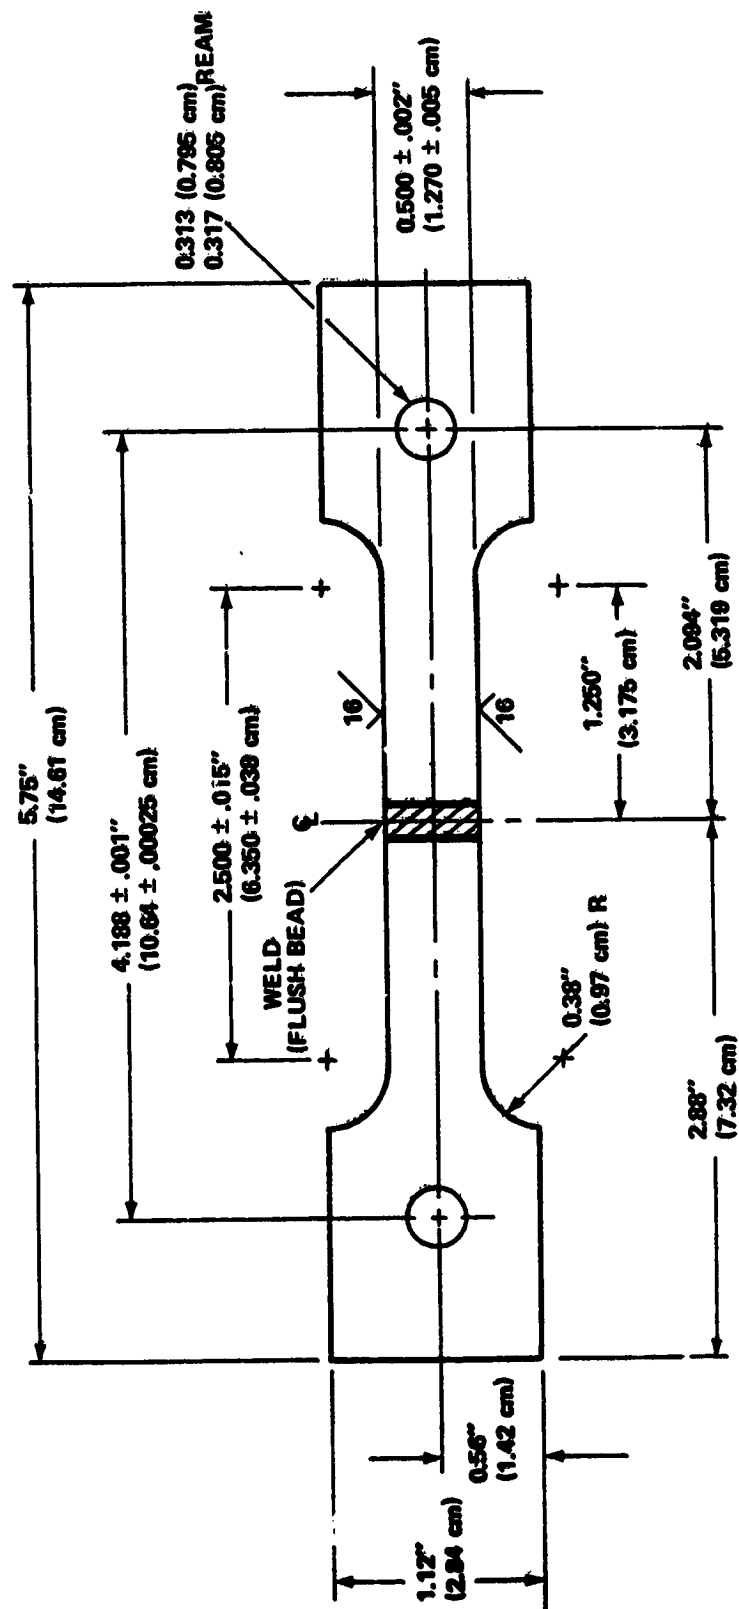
Transverse weld tensile specimen configuration for testing at -320° (-196° C).
